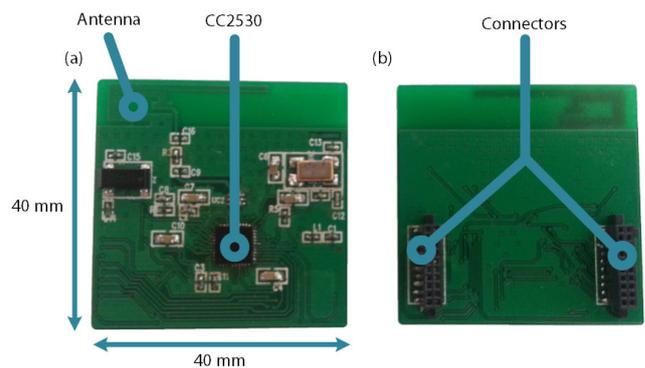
Developed CC2530 board with integrated PCB antenna: (a) Top view; (b) Bottom view.
